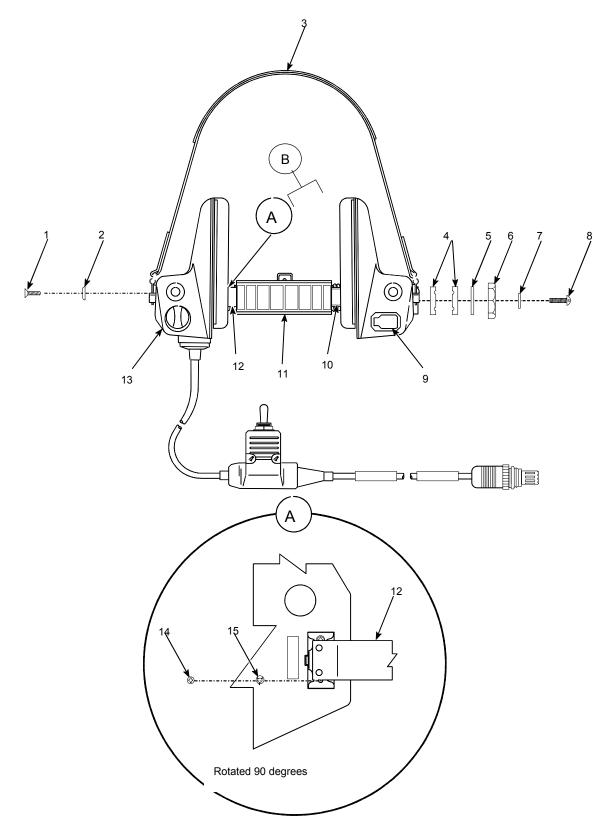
Headset Electrical Assembly H-365/VRC (Sheet 1 of 2)
